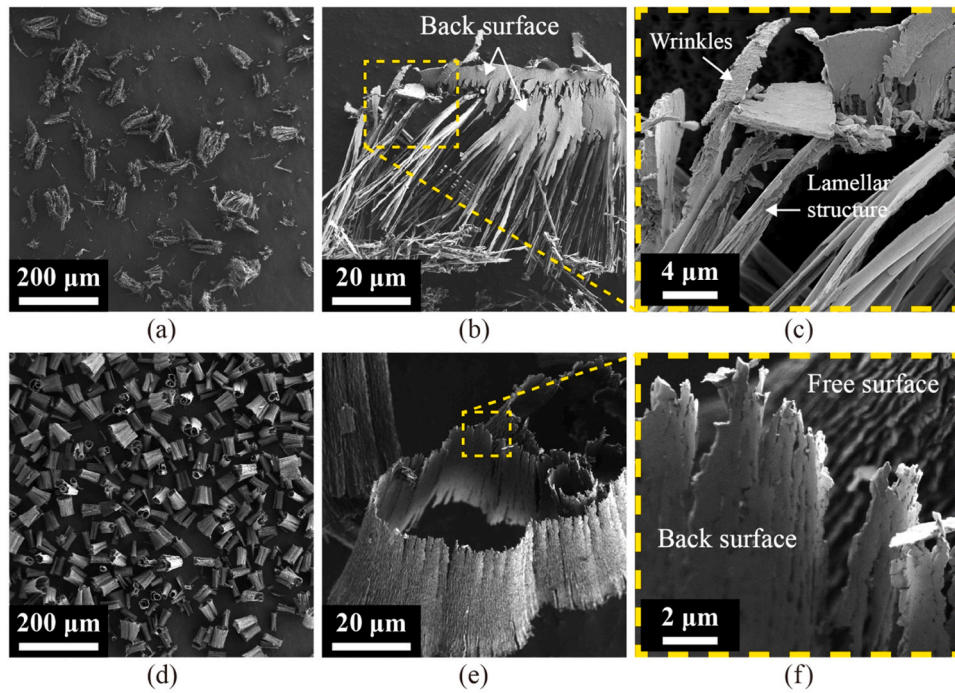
SEM images of cutting chips generated under dry conditions along the [11–20] direction with unused tool edges: (a) overall chip shape, (b) close-up view of a representative chip, and (c) high-magnification view of the chip structure formed using CC; (d–f) corresponding UVC-processed chips under identical conditions. (SEM parameters: accelerating voltage of 1.0 kV, and working distance of 3.0 mm.).
